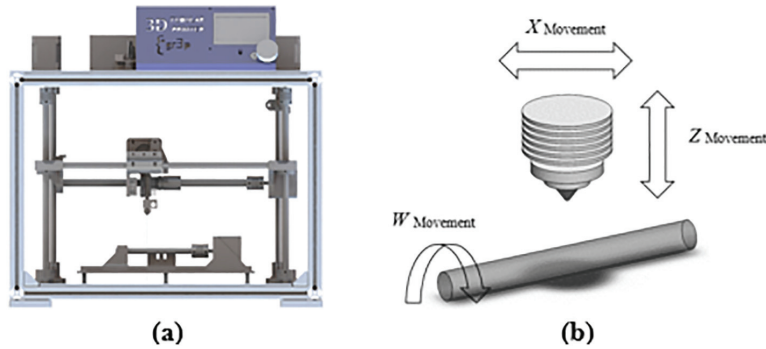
(a) 3D tubular printer machine (b) machine methodology.
